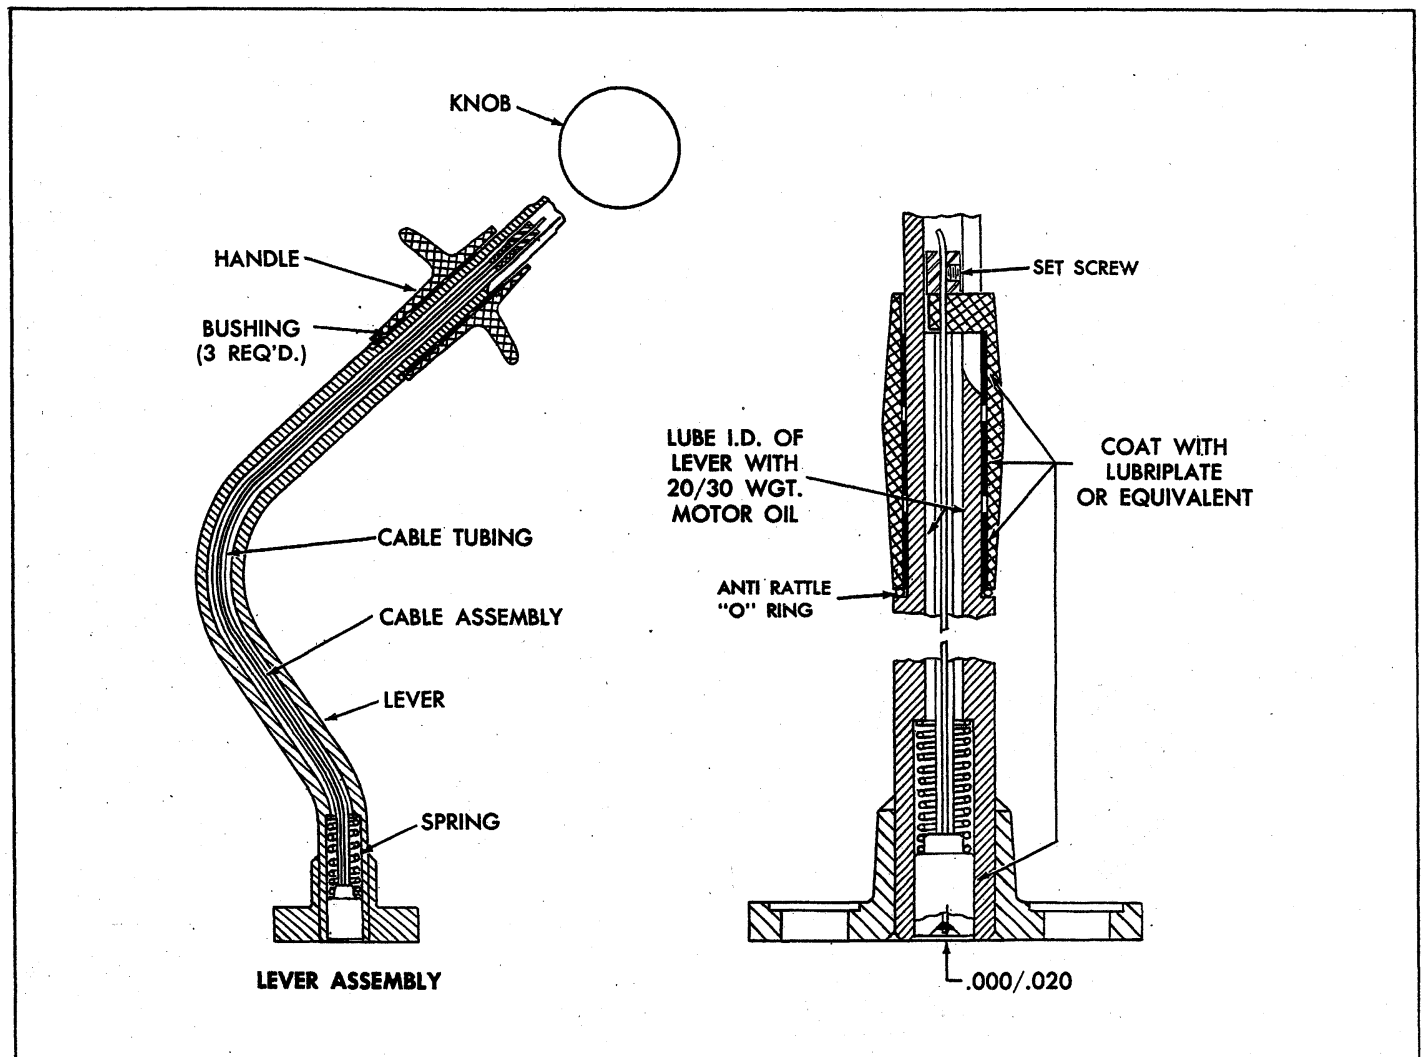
M - Gearshift Lever Assembly and Adjustment (Typical)
